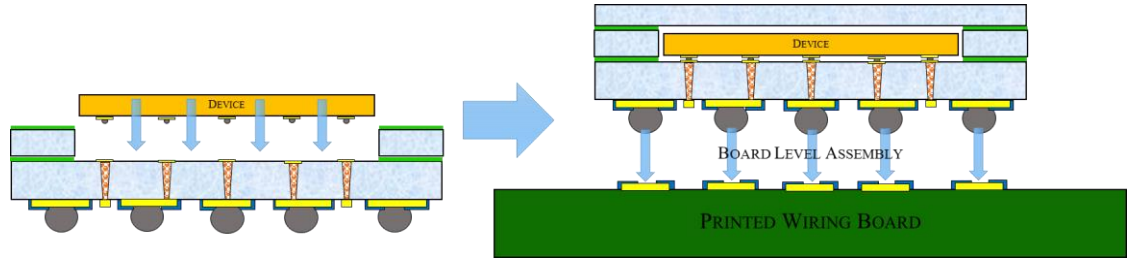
Concept image showing chip-last packaging architecture involving TGV metallization and RDL fabrication followed by die assembly and board level assembly
